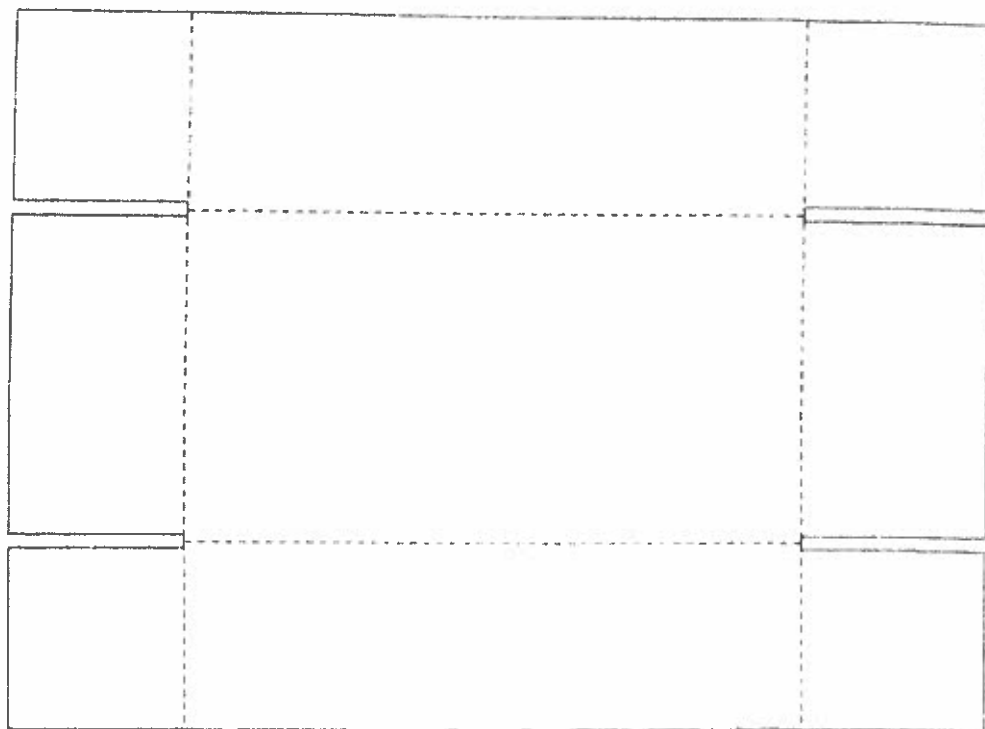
(b) – Design of telescopic cardboard box when unassembled (Lid components)
